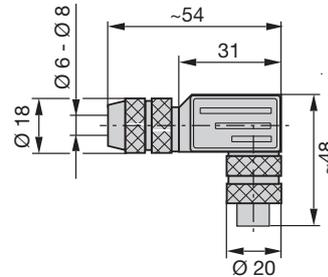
Connector BKS-S106-00 (pin) for BUS OUT
